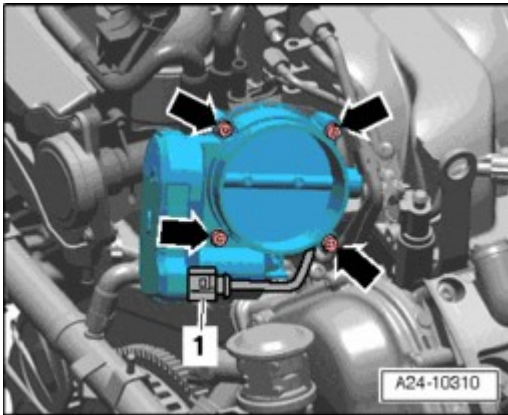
Disconnecting Electrical Connection At Throttle Valve Control Module J338 & Removing Bolts And Throttle Valve Control Module J338
